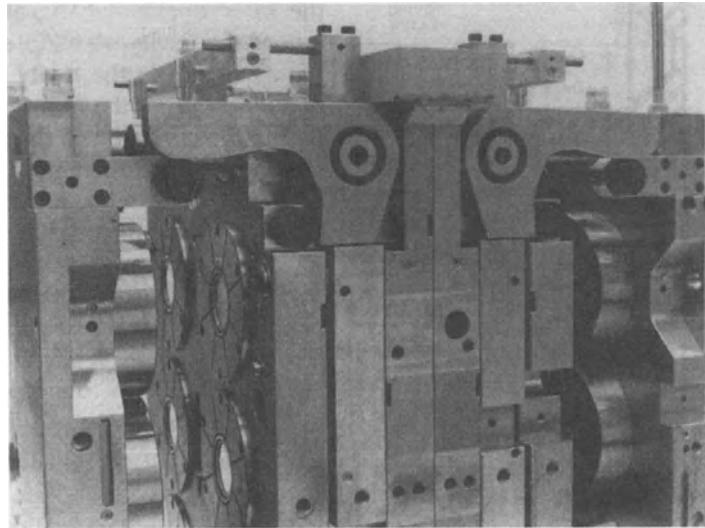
Cam-actuated stripper plate for lid mold.
